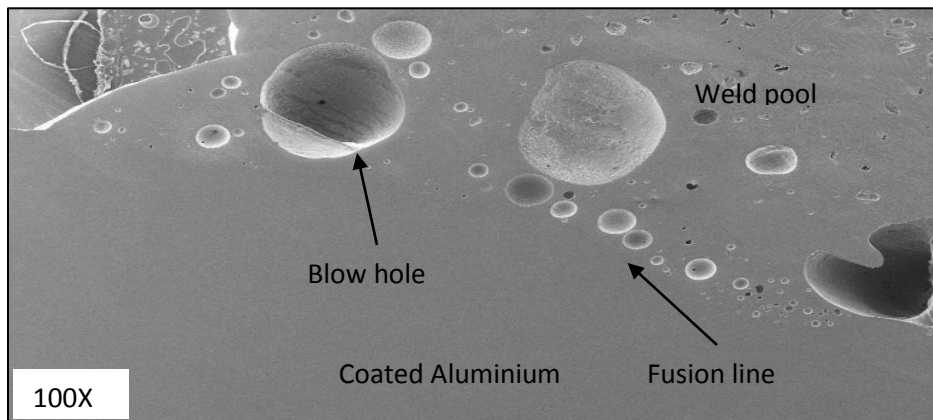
Interface between coated aluminium and weld pool
